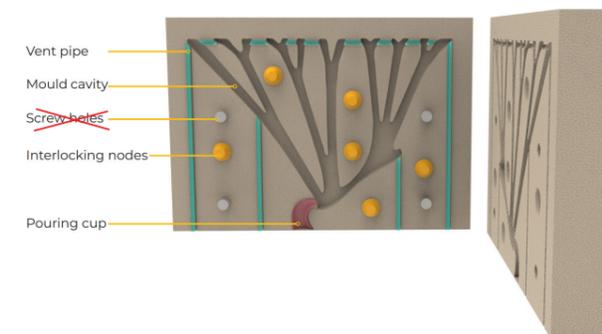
Design considerations of a 3D printed sand mould implemented for a final design (Bhatia, 2019).
